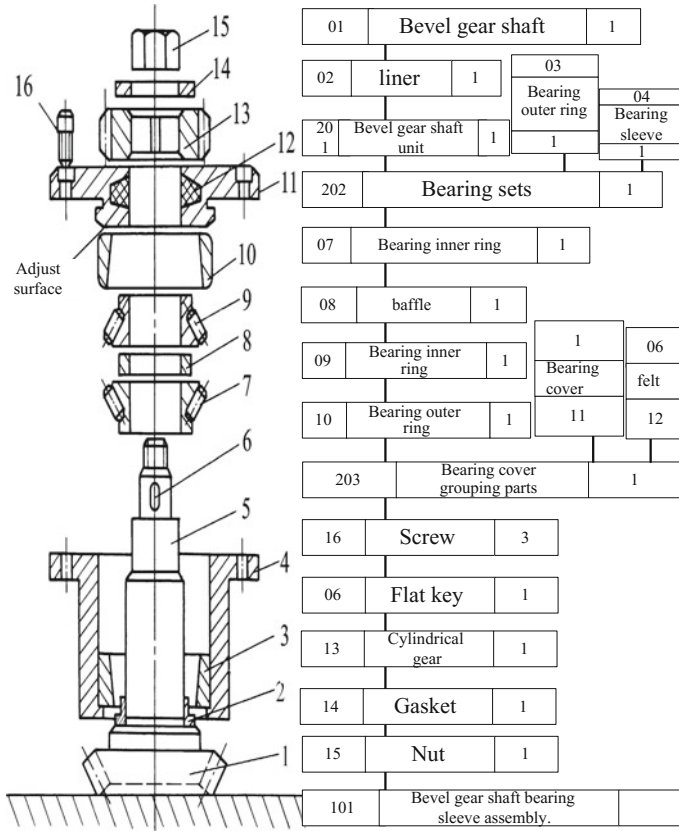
Assembly process diagram of bevel gear shaft assembly
